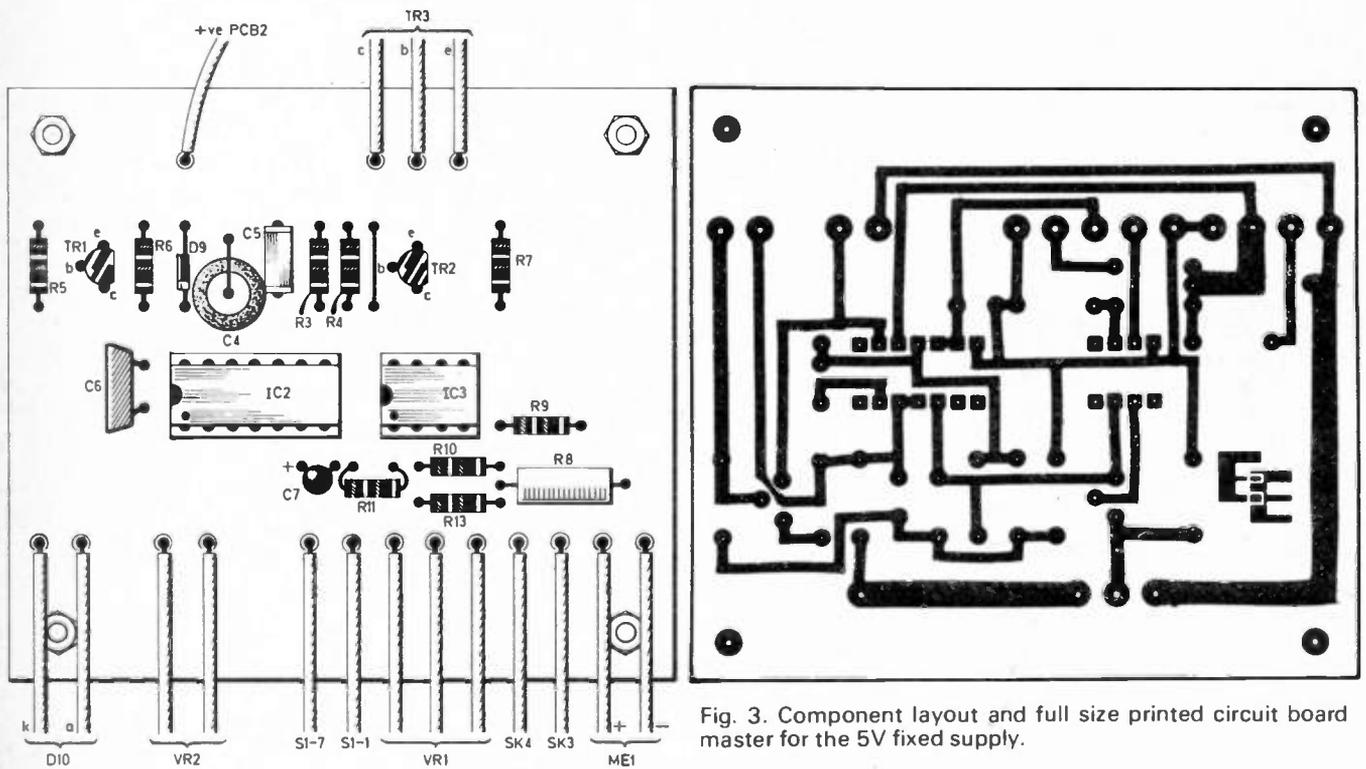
Component layout and full size printed circuit board master for the 5V fixed supply.
